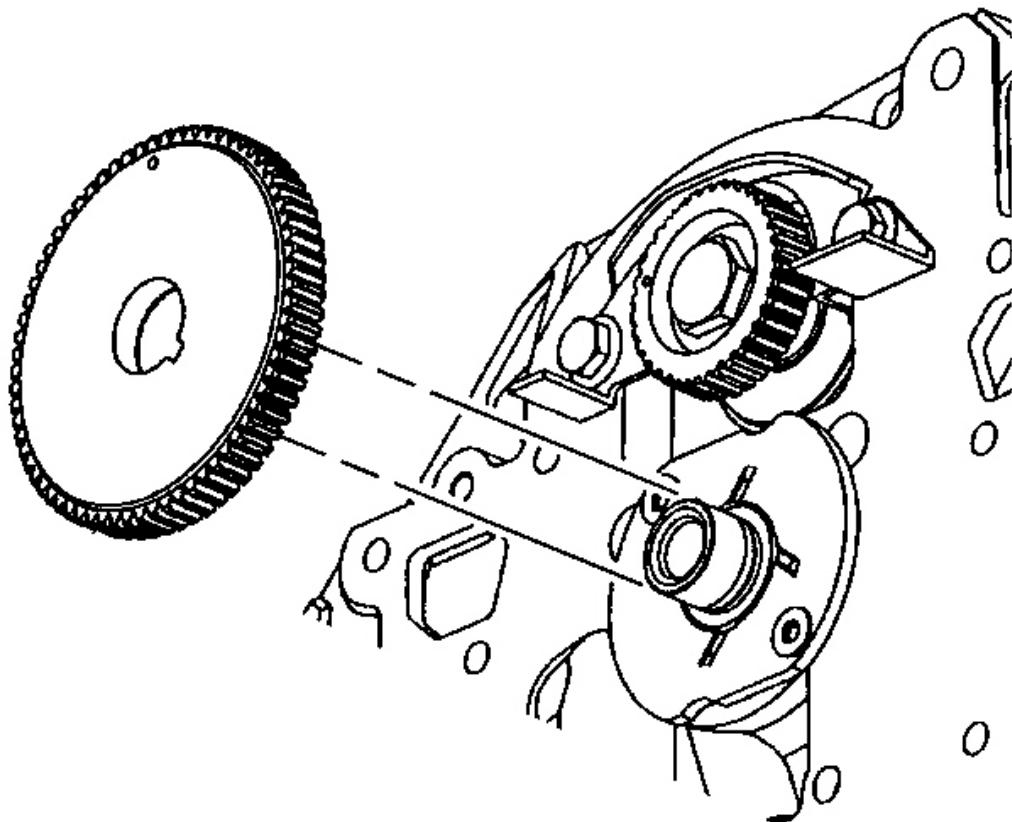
Locating Camshaft Sprocket & Timing Chain
